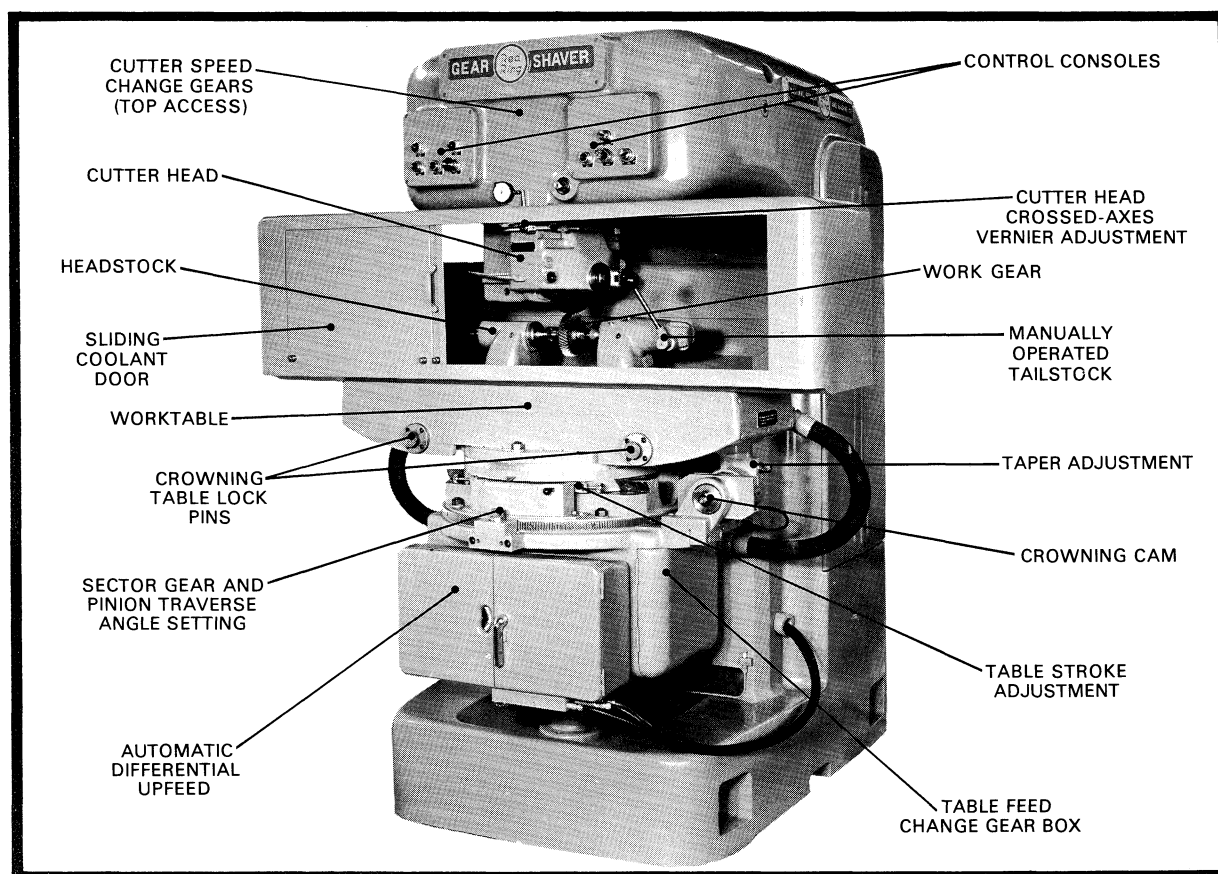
Operating components of a knee-and-column type universal gear shaving machine equipped for manual loading.
